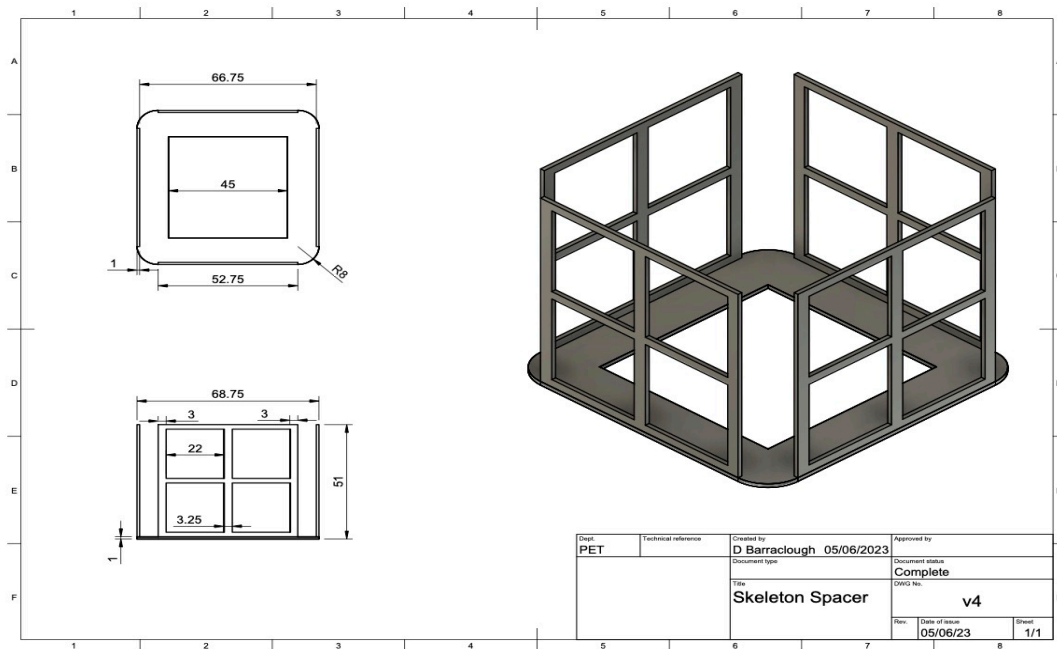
Drawing of spacer insert designed in Fusion 360. The top view and side view are shown on the left with dimensions labelled. The piece consists of 5 elements, printed separately.
